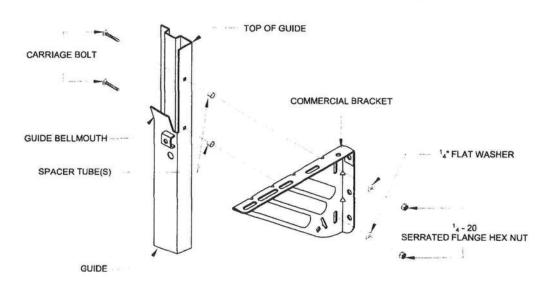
DRIVE END (RH Shown/LH Opposite)
